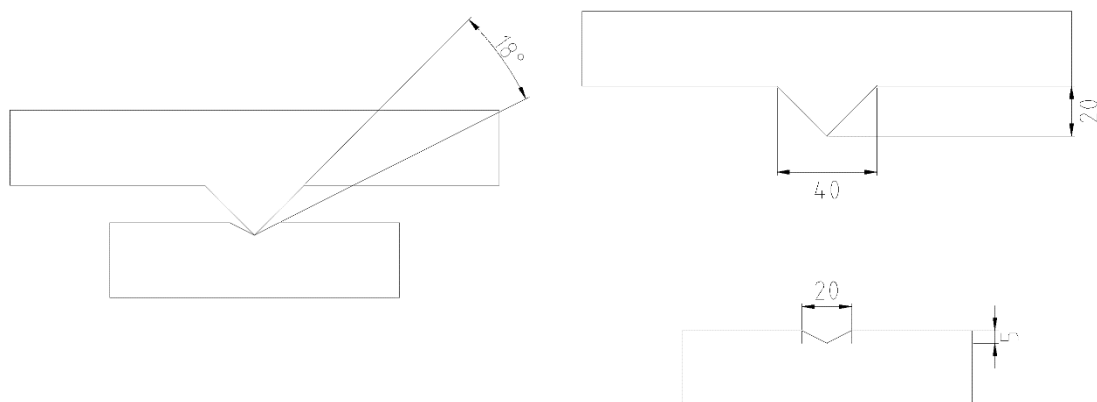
Dimensions (in mm) of chamfer and wedge of the profiled steel plates used to reproduce a pin support.
